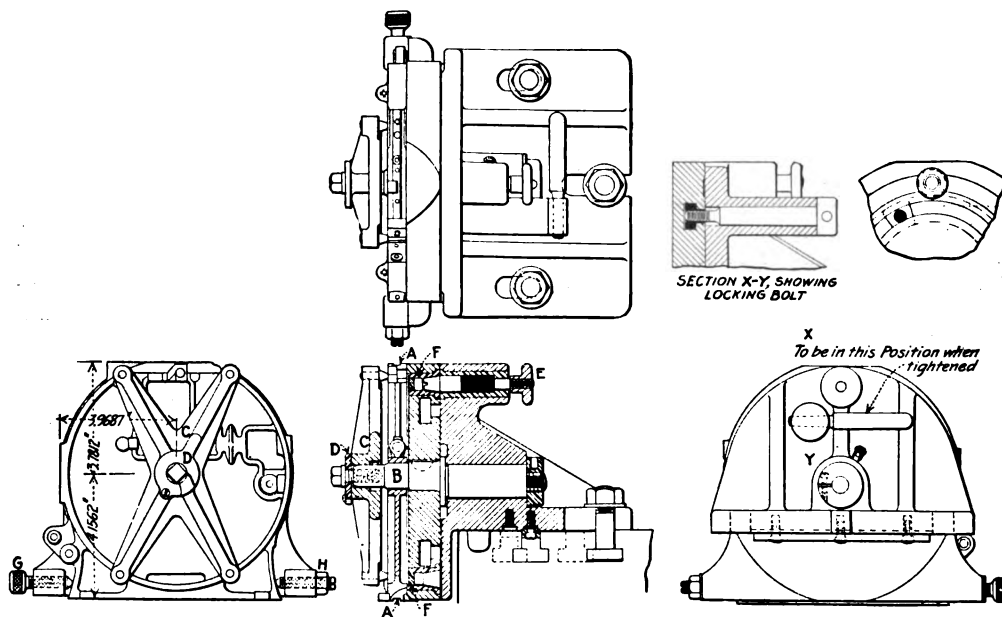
MILLING FIXTURE FOR CENTER PLATES
